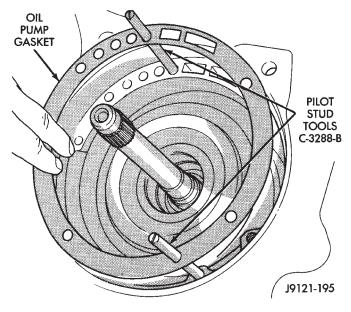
Installing Pilot Studs And Oil Pump Gasket
